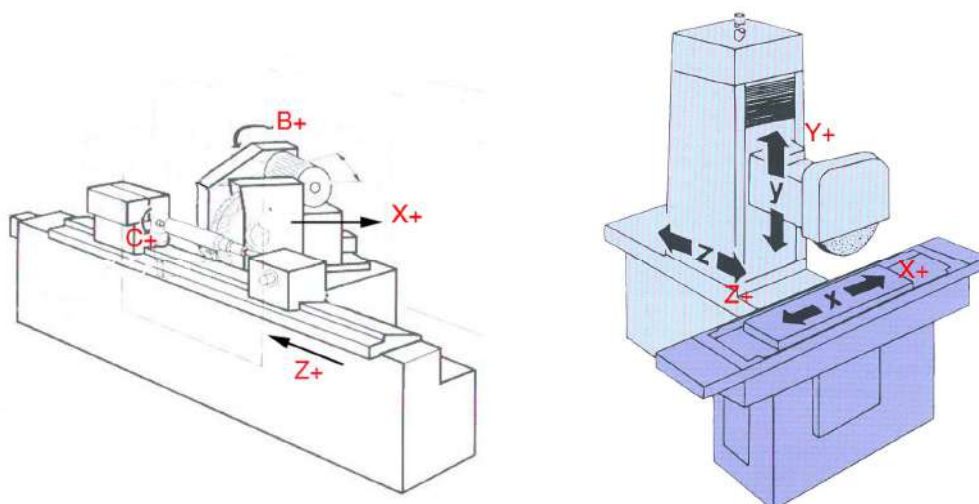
MCS for grinding (cylindrical grinding machine, surface grinding machine)
